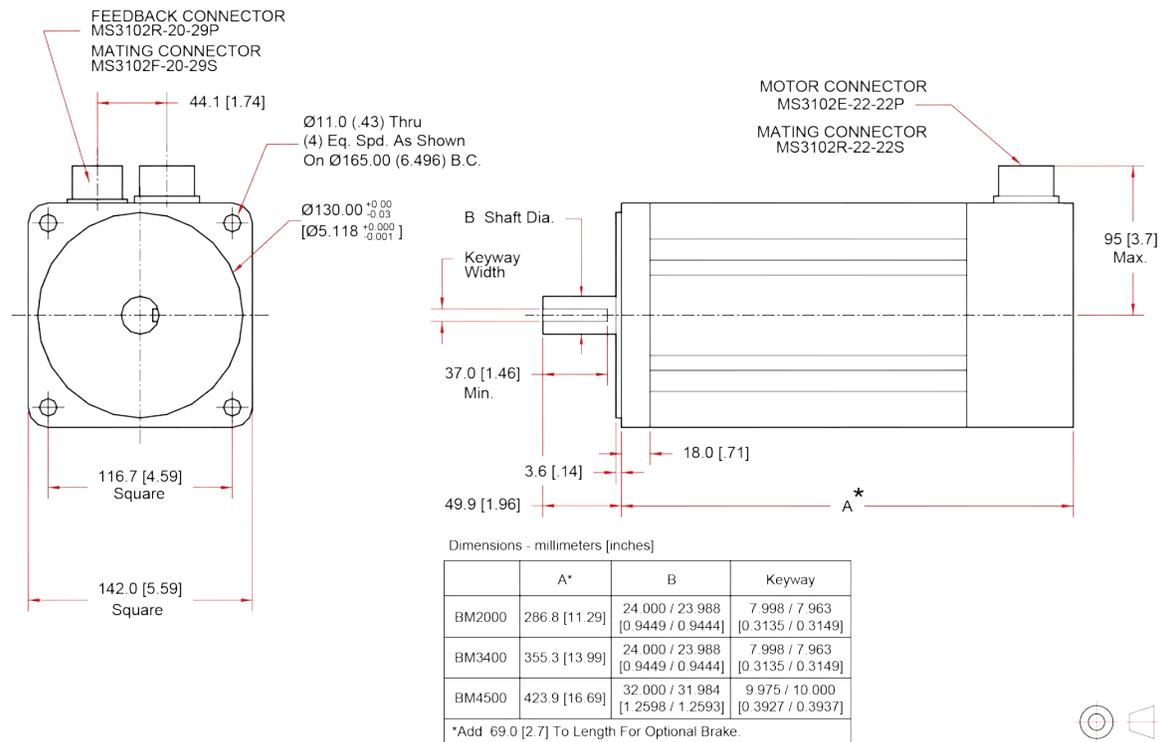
BM2000, BM3400, BM4500 Model Dimensions (NEMA 56)
